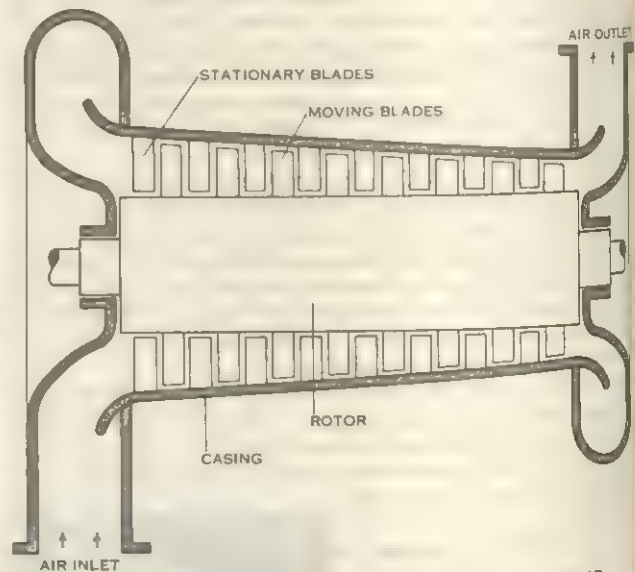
CROSS SECTION OF AN AXIAL-FLOW COMPRESSOR
